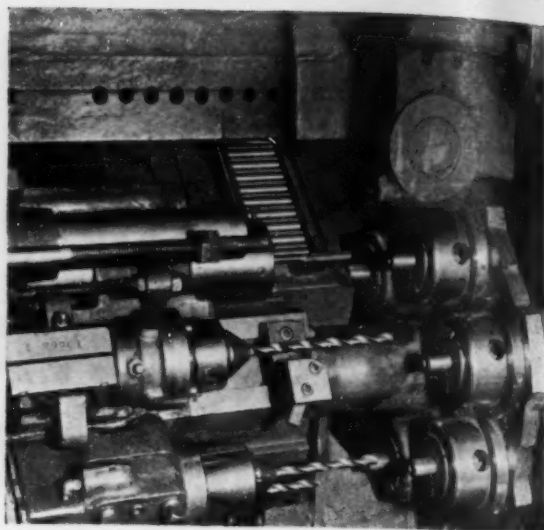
Using automatic magazine feed, a six-spindle automatic drills and reams central hole and chamfers outside diameter of 250 cast iron valve guide bushings per hr.
